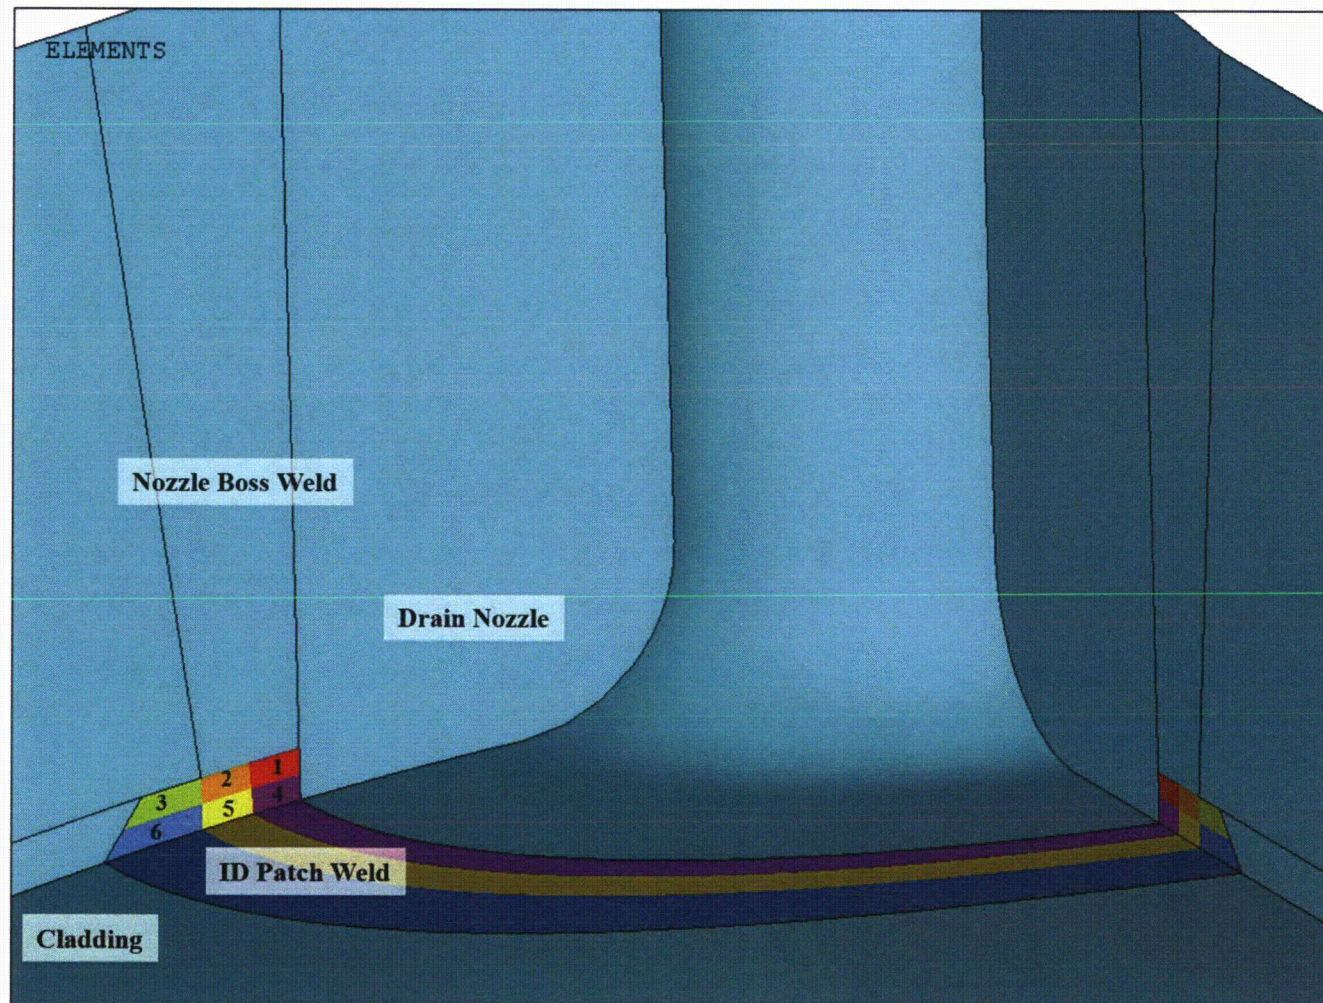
Weld Nugget Definitions for the Hot Leg Drain Nozzle ID Patch Weld
